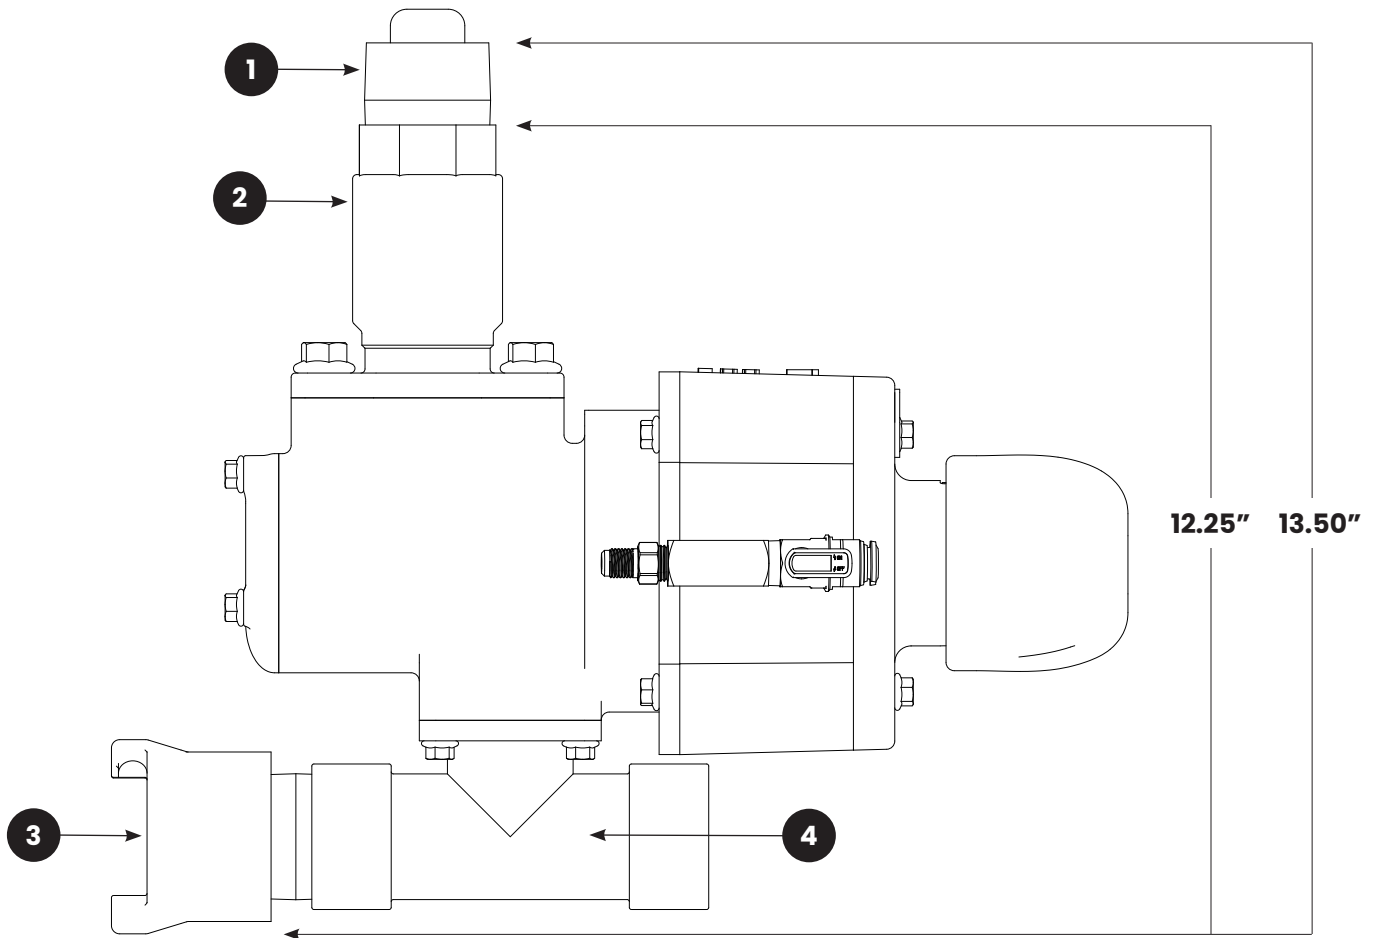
(1) 1-1/2" Installation Nipple; (2) Flanged Ball Valve; (3) Hose Coupling (REF) not included; (4) Outlet Tee
